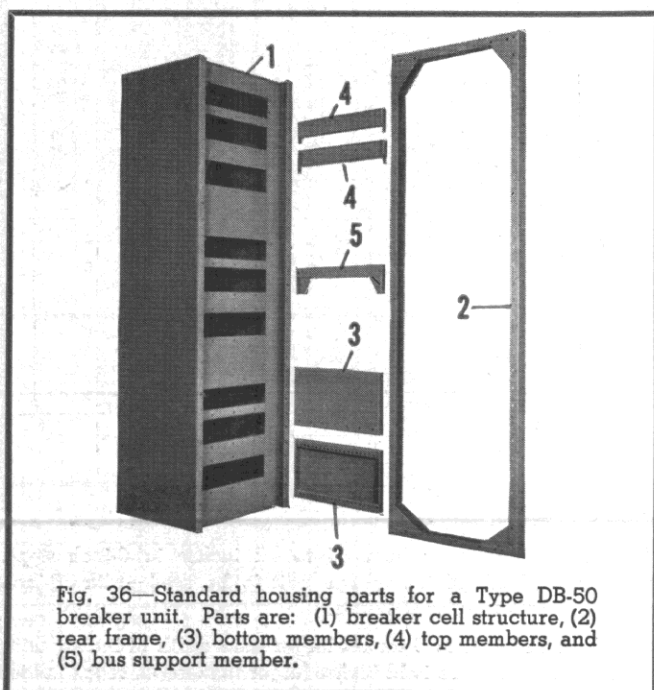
Standard housing parts for a Type DB-50 breaker unit. Parts are: (1) breaker cell structure, (2) rear frame, (3) bottom members, (4) top members, and (5) bus support member.
